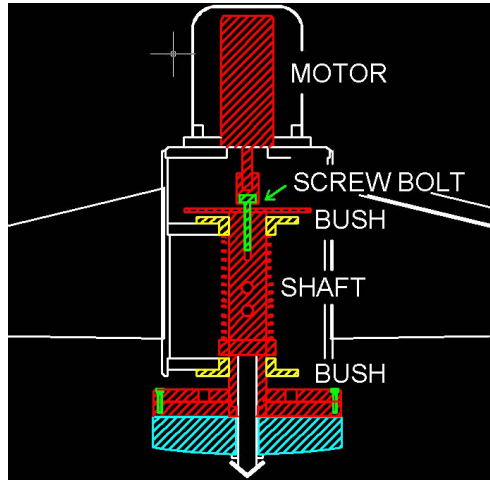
Drawing of the focus unit. Shaft and bushes are made of the same steel. Copyright: Okita et al. (2010) [51]
